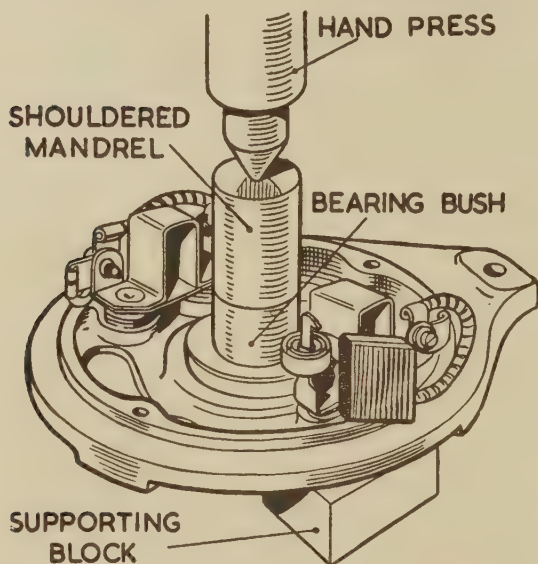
Fitting a New Bronze Bearing Bush in Dynamo.
